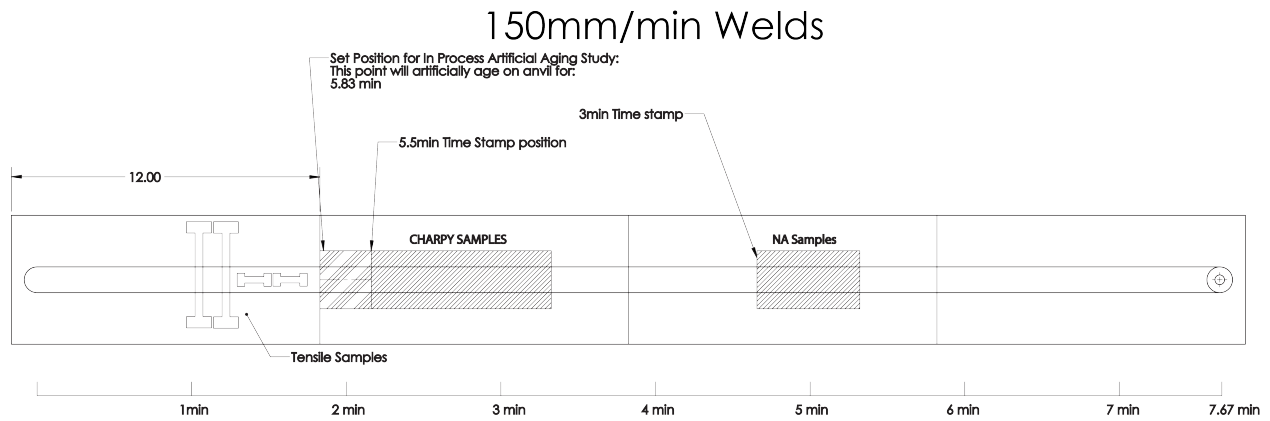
Sample removal diagram for welds ran at 150 mm/min
